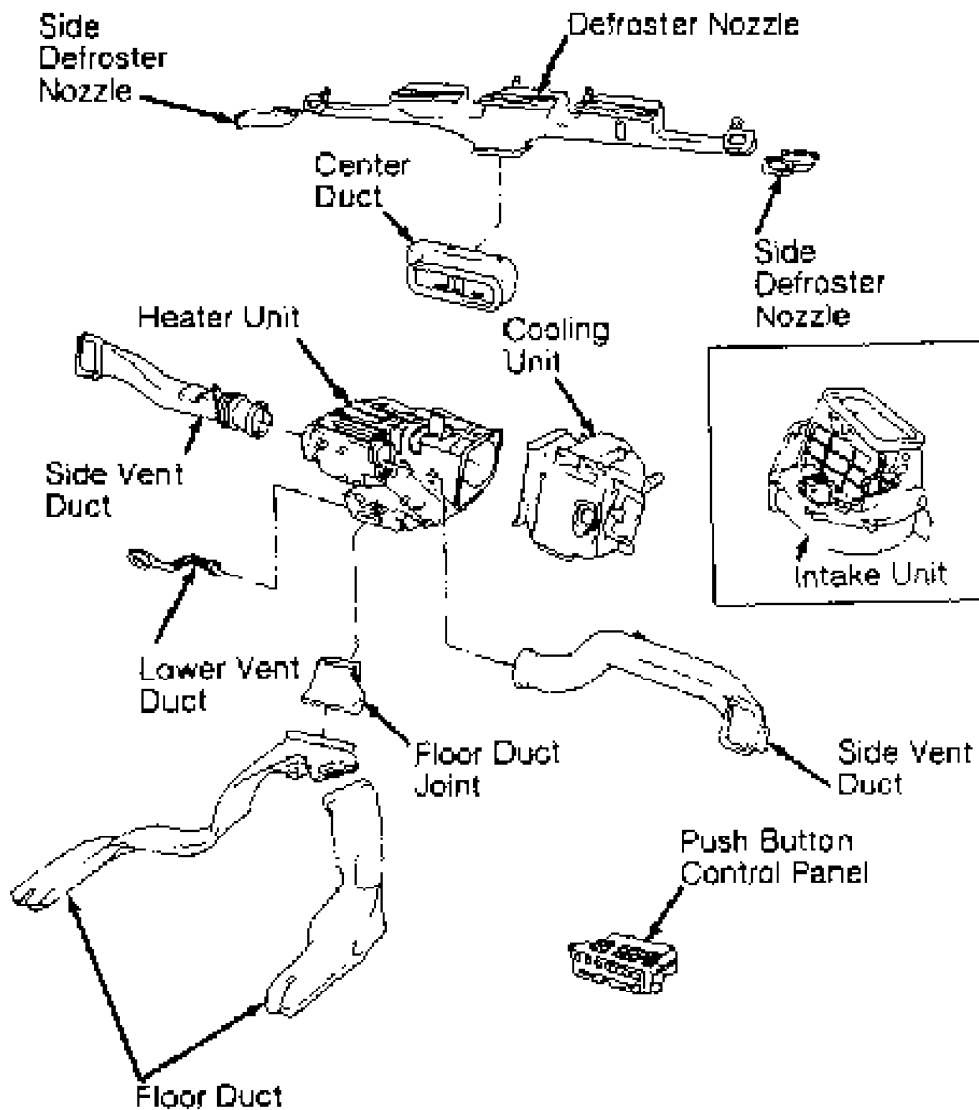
Exploded View of A/C-Heater Components & Ducts (Typical)
